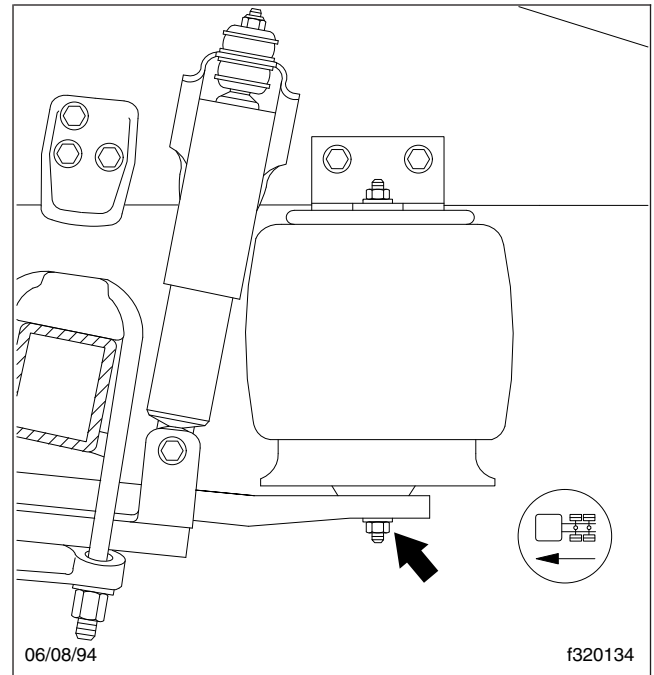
, Capscrew Connecting Leaf Spring and Air Spring
